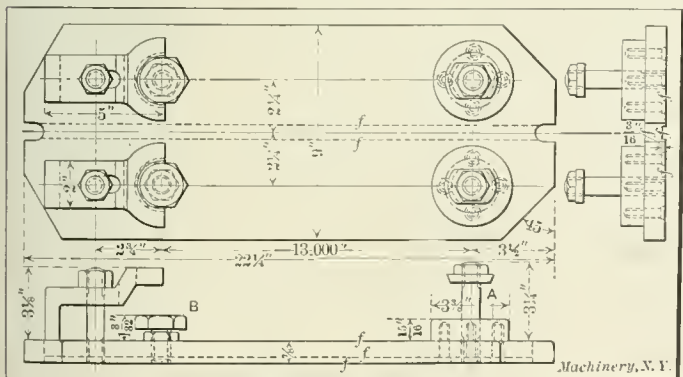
Second Milling Operation—Jig for Holding the Rod while Milling the Other Side
